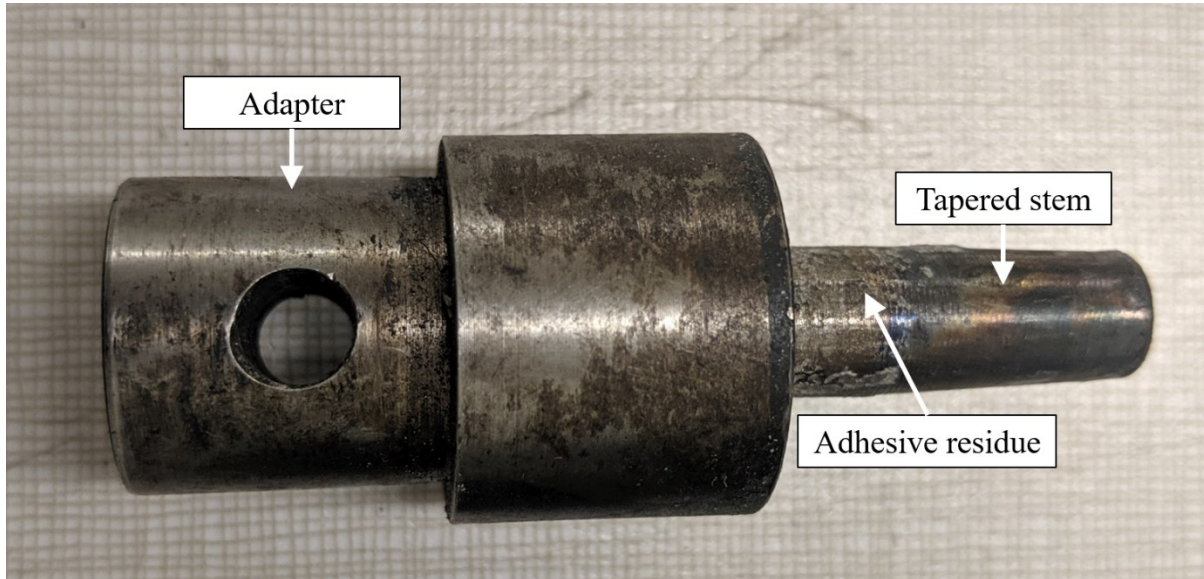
Image of end tab used for attaching TBC specimens to electrohydraulic test frame
